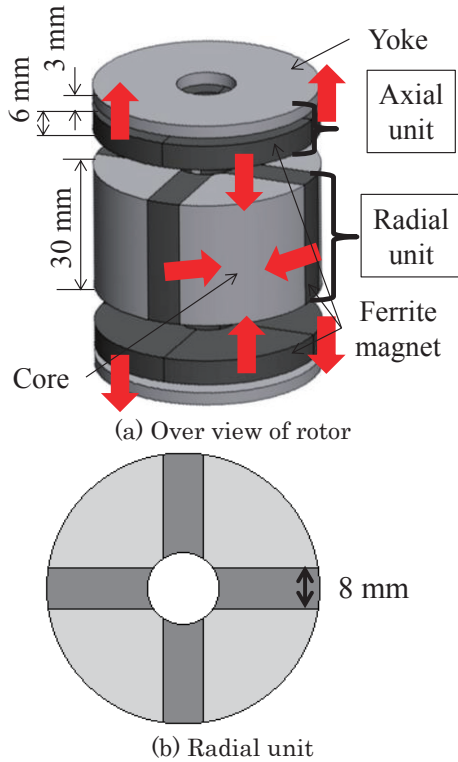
Shape of three-dimensional magnet arrangement (3D-MA) model.
